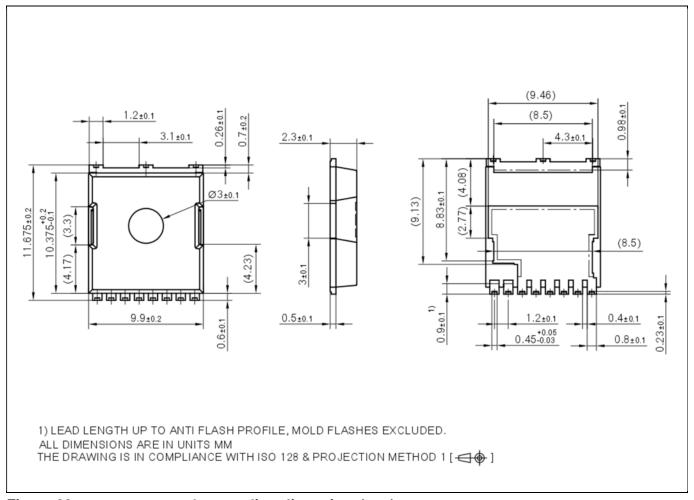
PG-HSOF-8-3 Package Outline, dimensions (mm)
